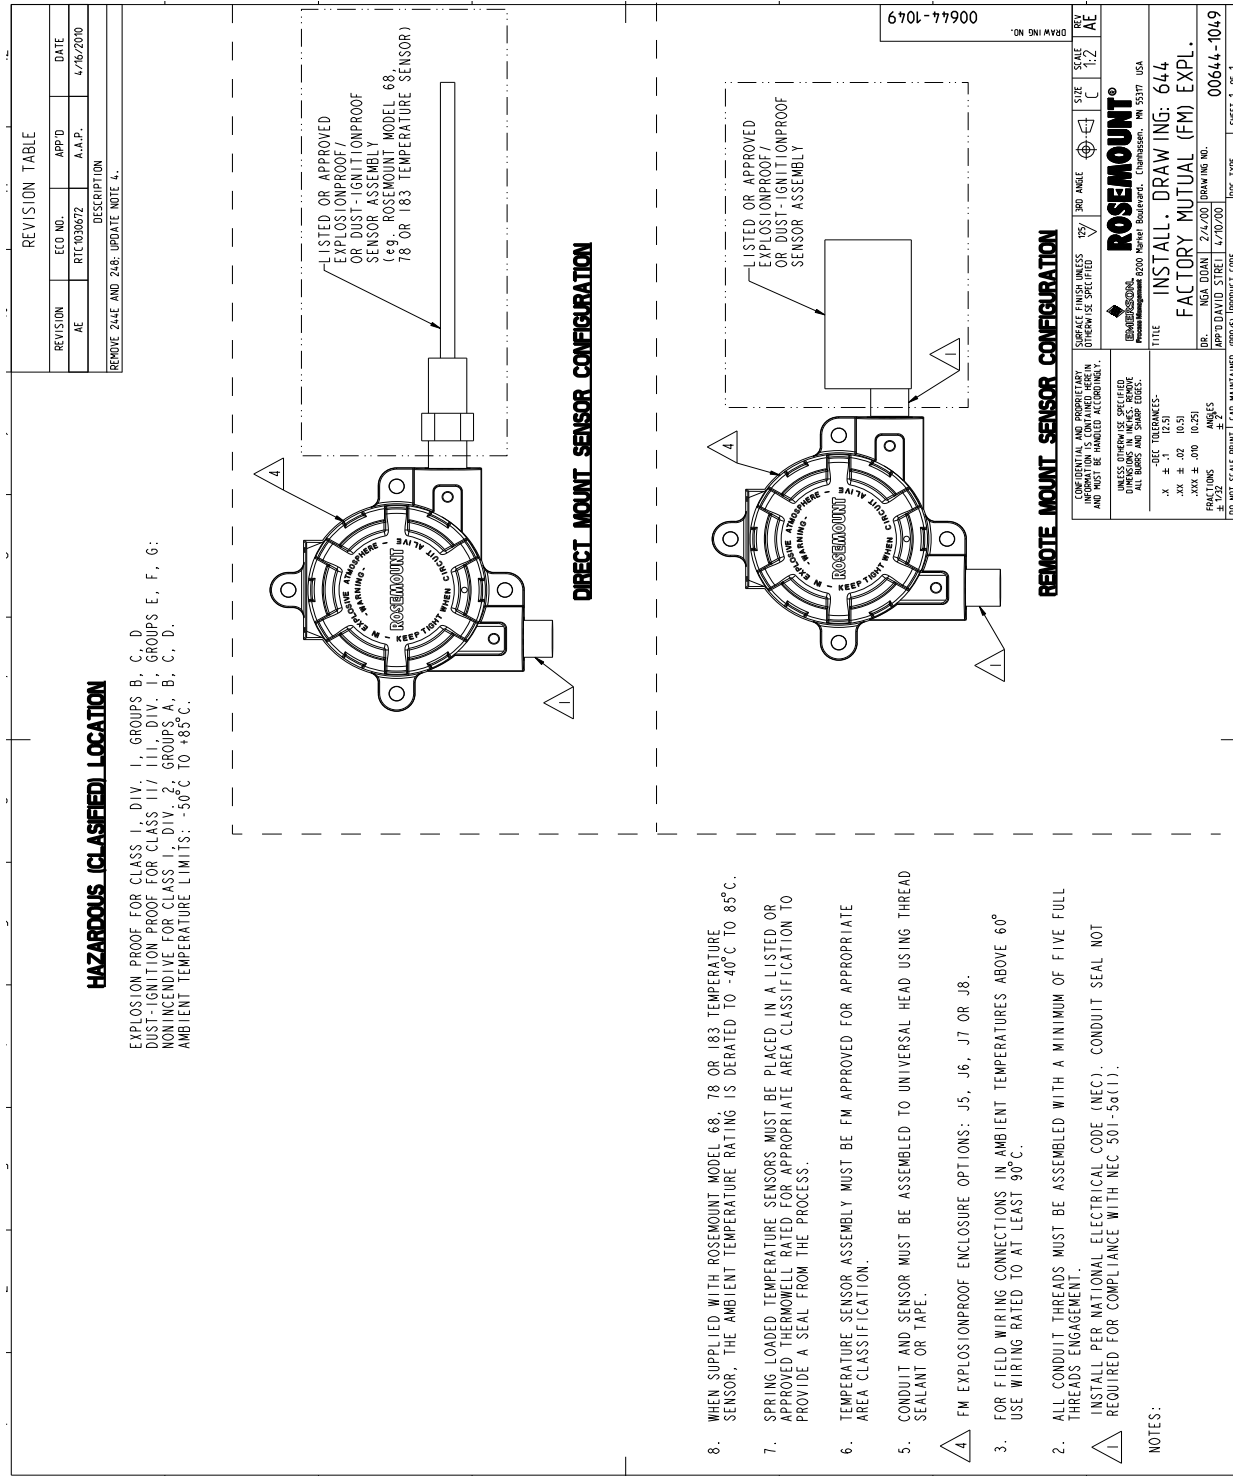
FM Explosion-Proof Installation Drawing 00644-1049, Rev. AE
